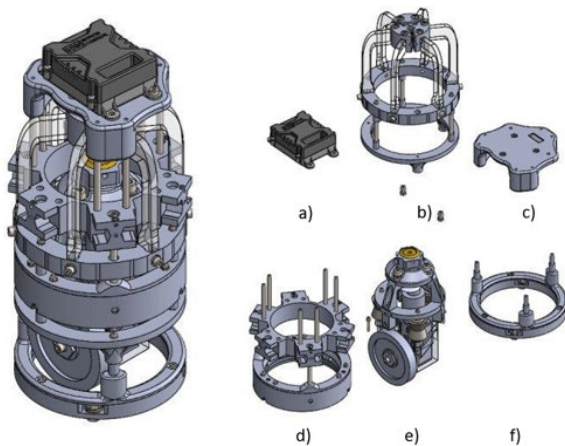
Locomotion module of the Ibex platform and exploded view of the locomotion module of the Ibex platform. The various modules in order: a) Roboclaw 2 × 7A b) Linear Module c) Force Sensor Module d) Top Module e) Bottom Module f) Ball Bearing Positioning (Linear Shaft) Module.
